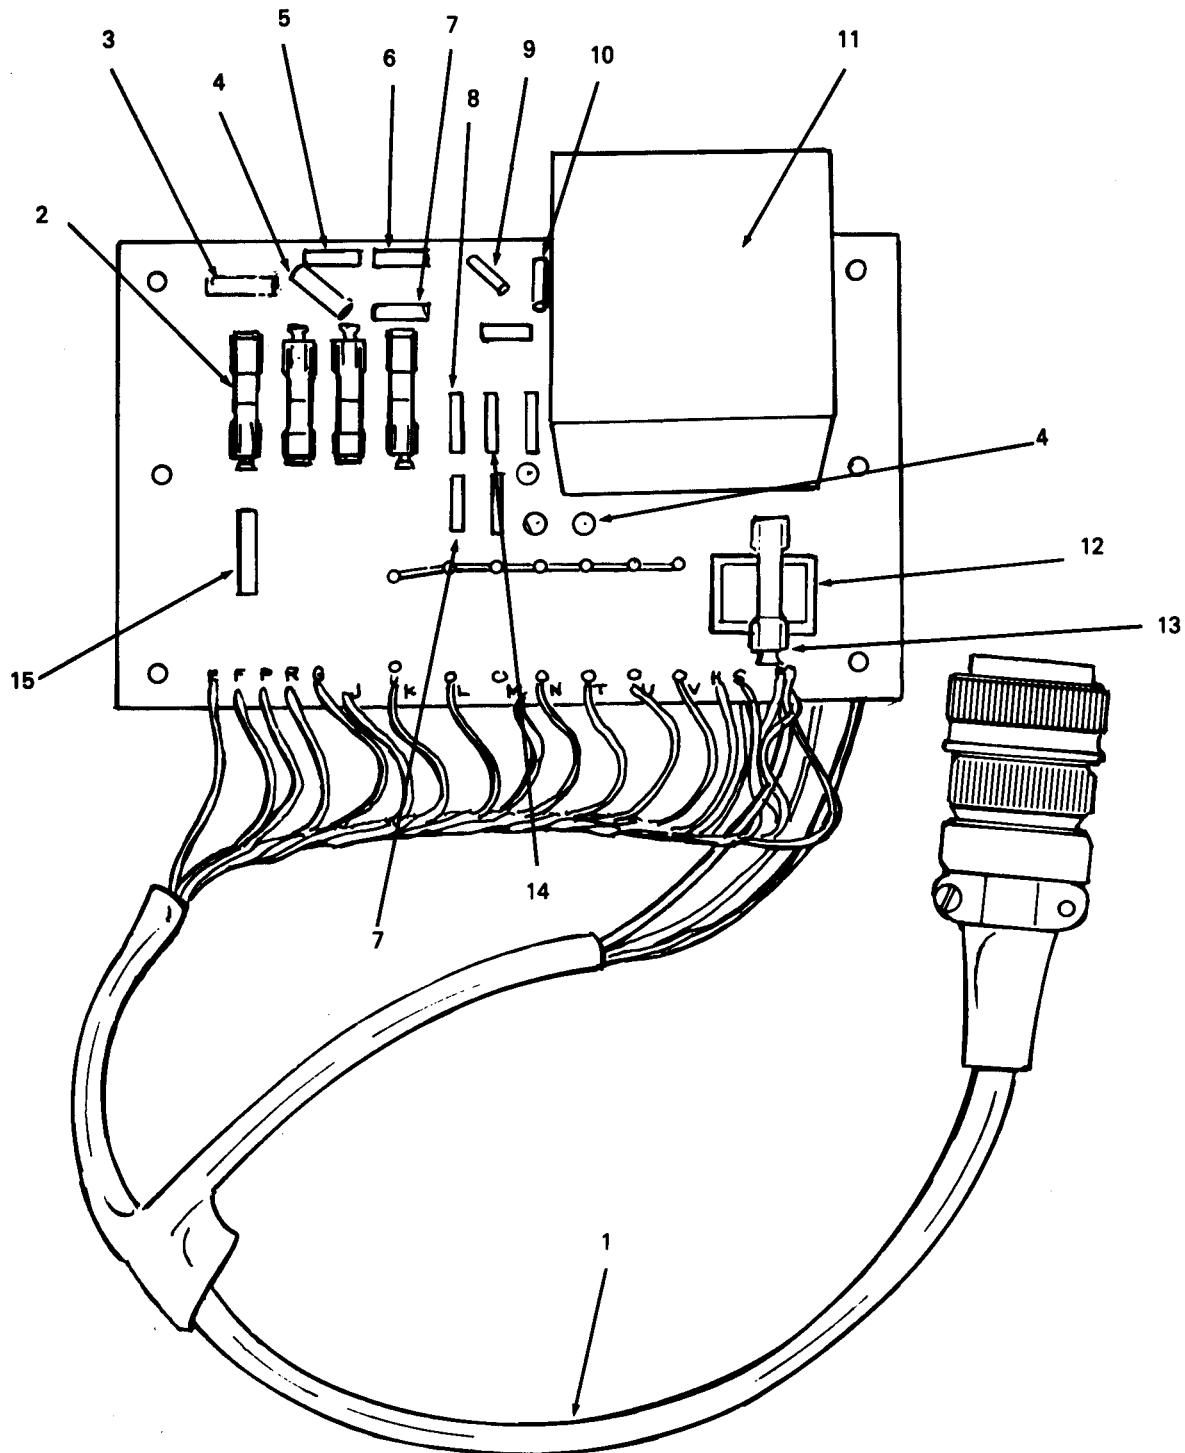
Circuit Board Assembly (Sheet 1 of 2)
